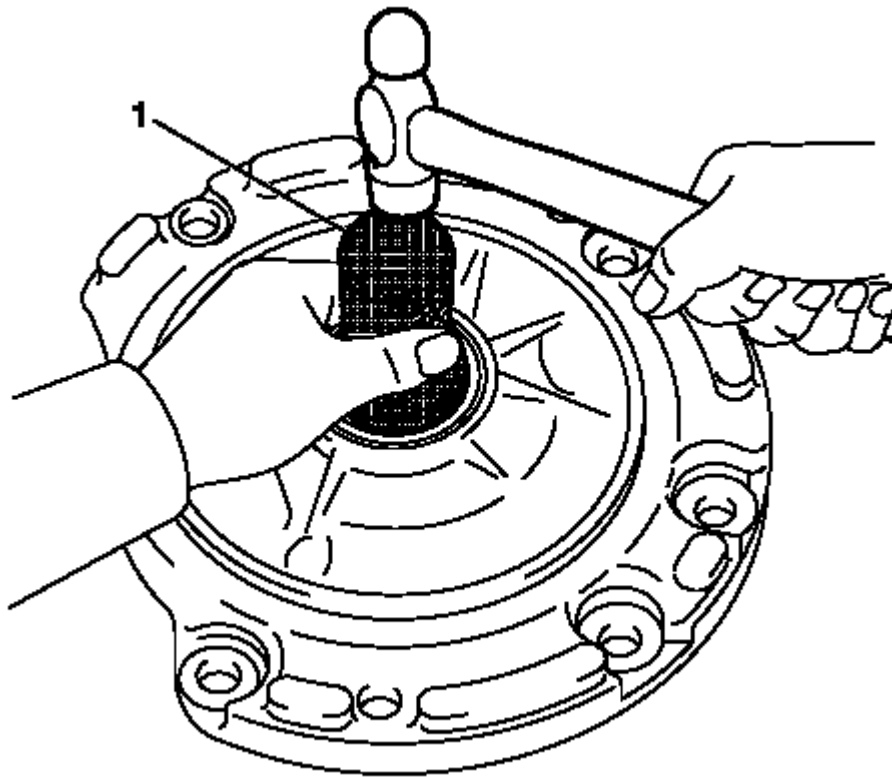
Identifying DT - 50955 Oil Pump Seal Installer And A Hammer
